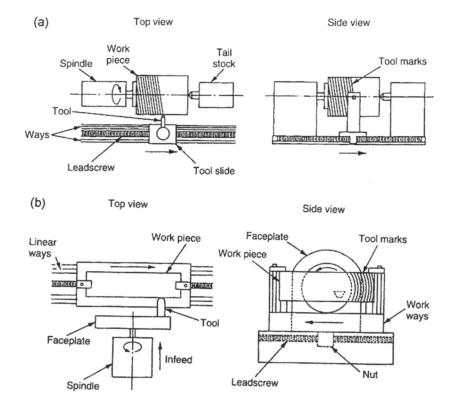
Schematics of (a) a lathe type SPDT machine used to turn cylindrical surfaces and (b) a fly cutter SPDT machine used to turn flat surfaces. (From Parks.¹¹)
